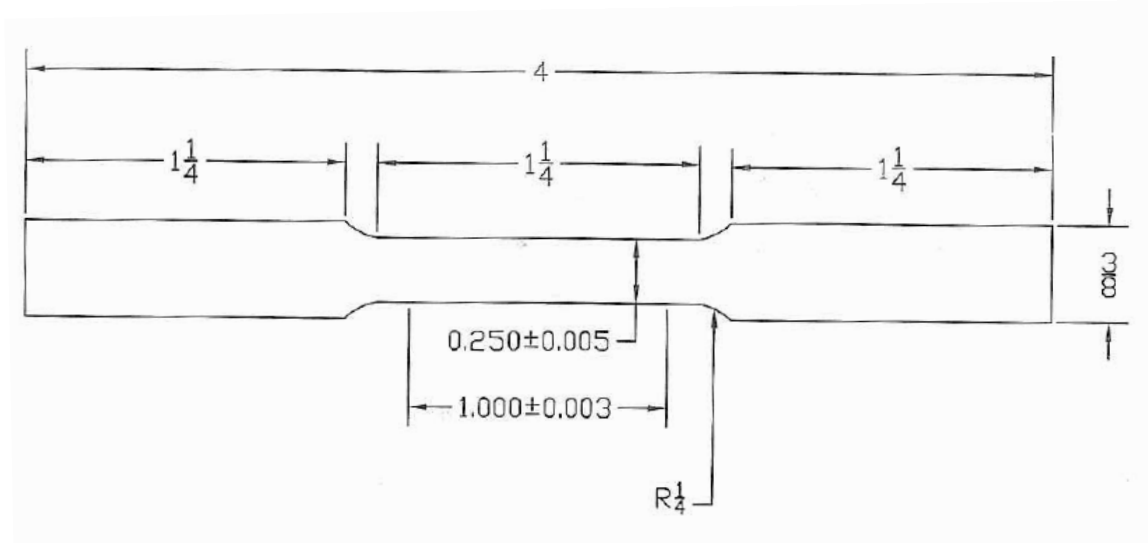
Tension specimen dimensions (all dimensions in inches).
